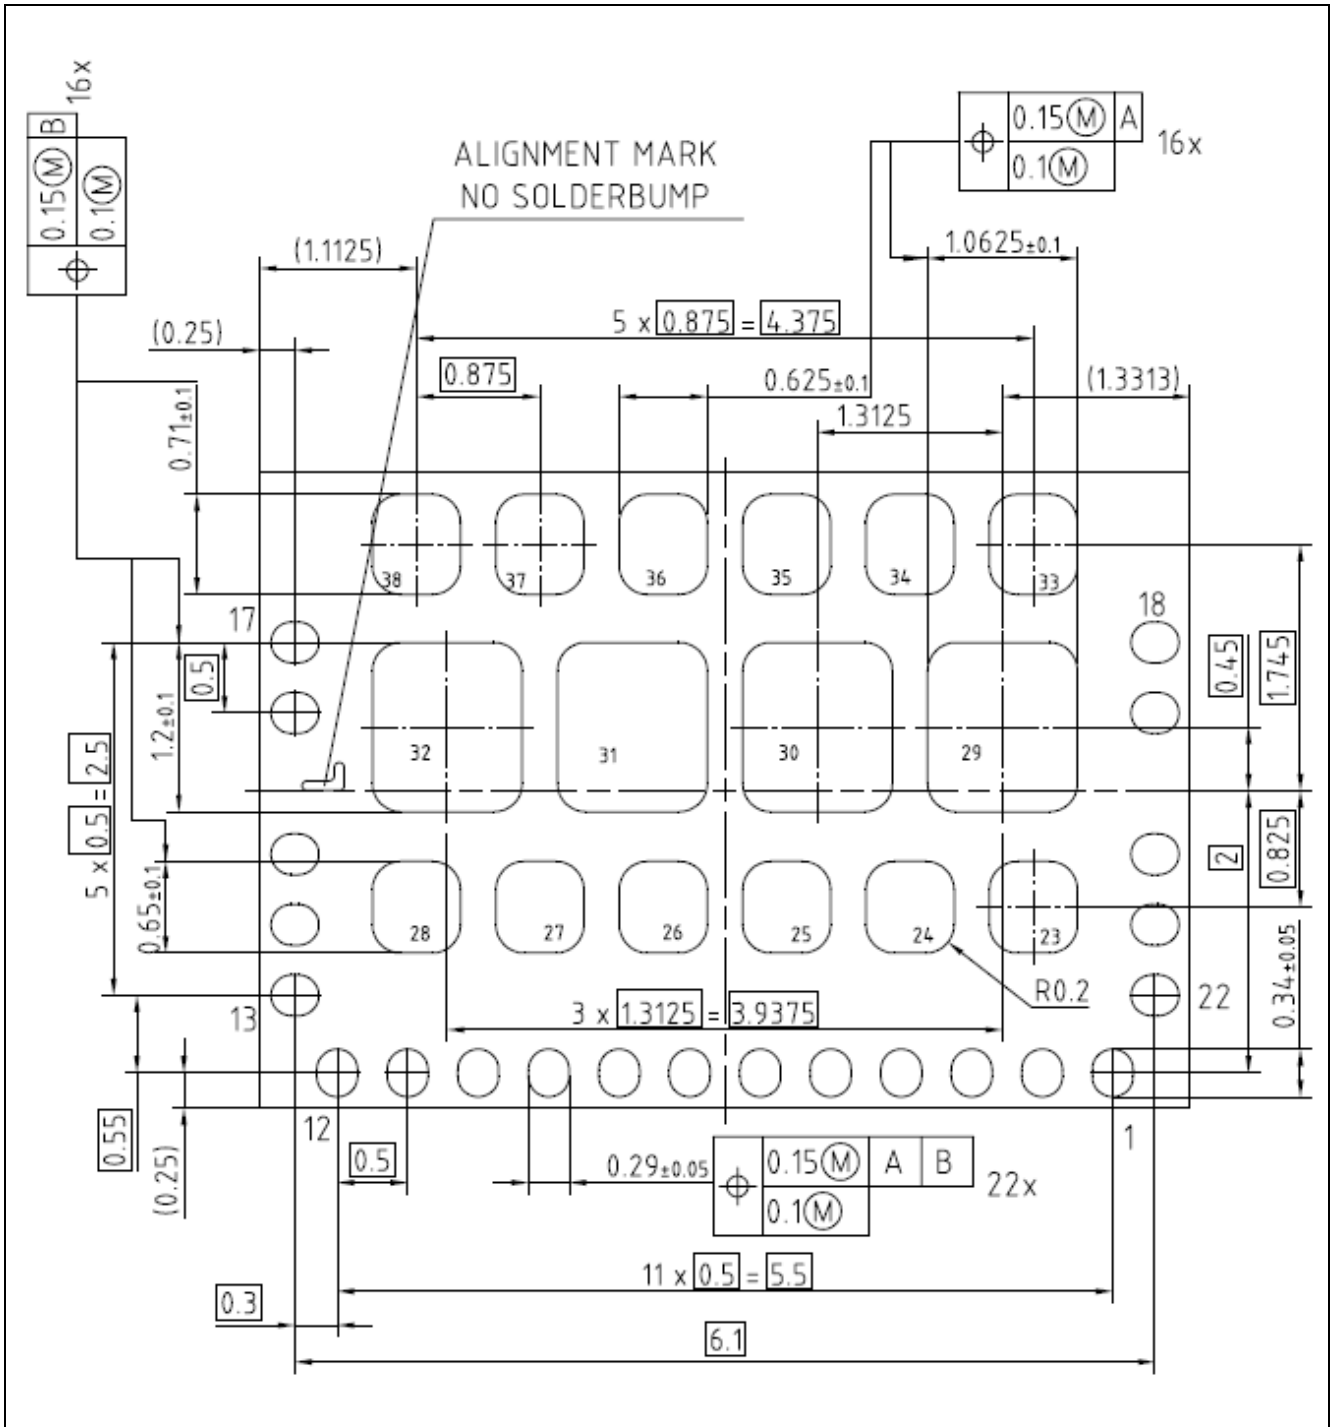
Mechanical Dimensions of Package (Bottom View) in mm
